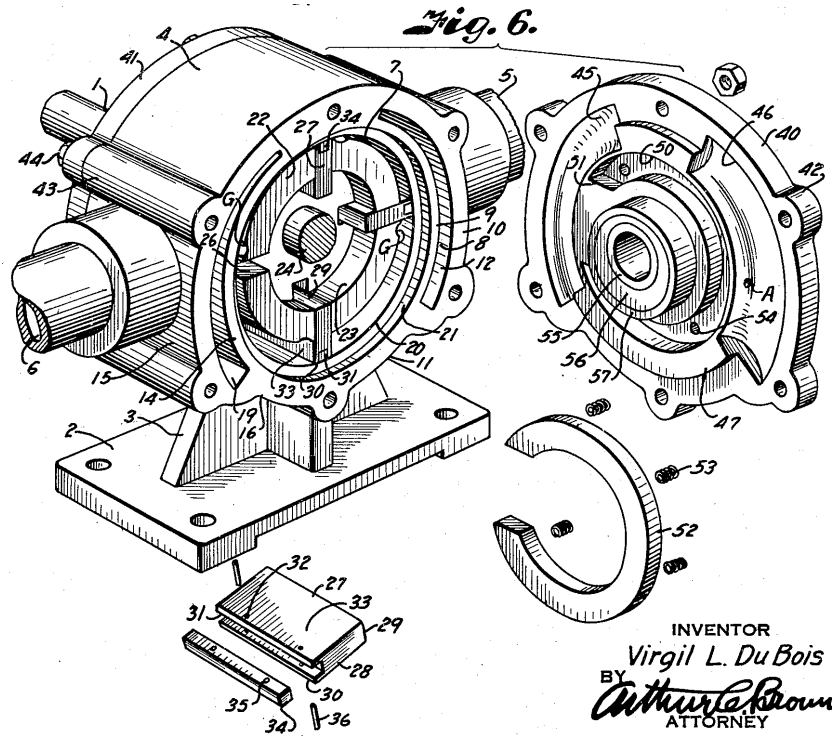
Illustration of a vane motor with the end plate (40) removed, vane seals (27), stator (7), and rotor (22) (19).
